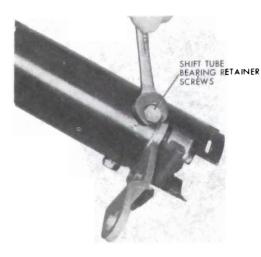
Removing Screws from Shift Tube Bearing-Manual Transmission
